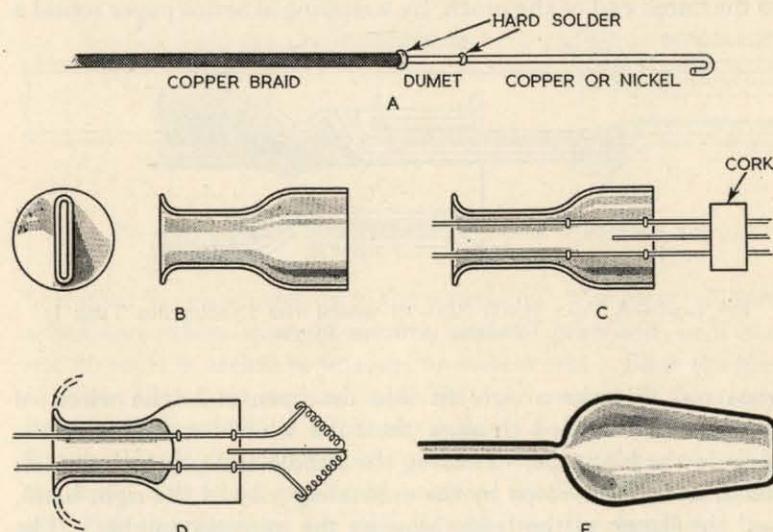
MAKING A FLAT PINCH OR PRESS SEAL
